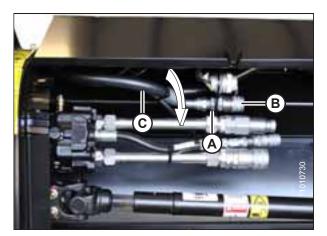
Auger and Reel Pressure Coupler and Hose – 5.5 m (18 ft.) Header Shown
